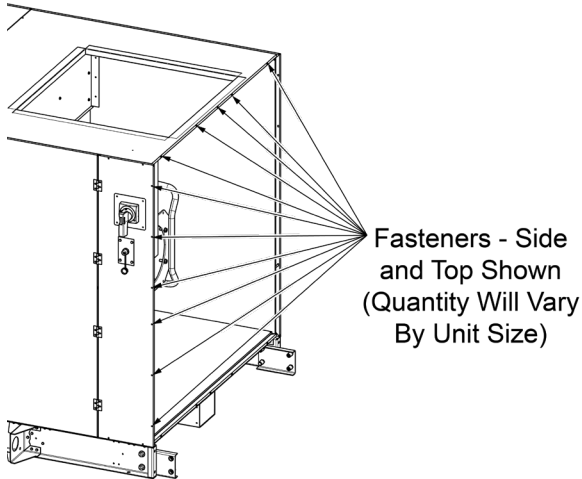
Size 060-100 Section Disassembly - Cabinetry
